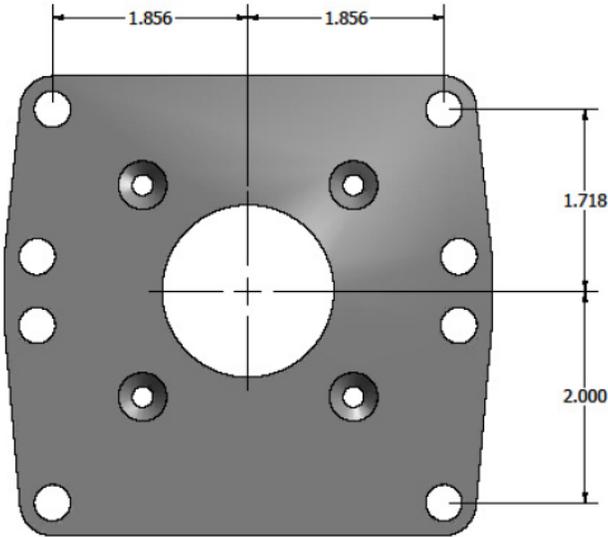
Universal Mounting Bracket (UMB) Hole Pattern
